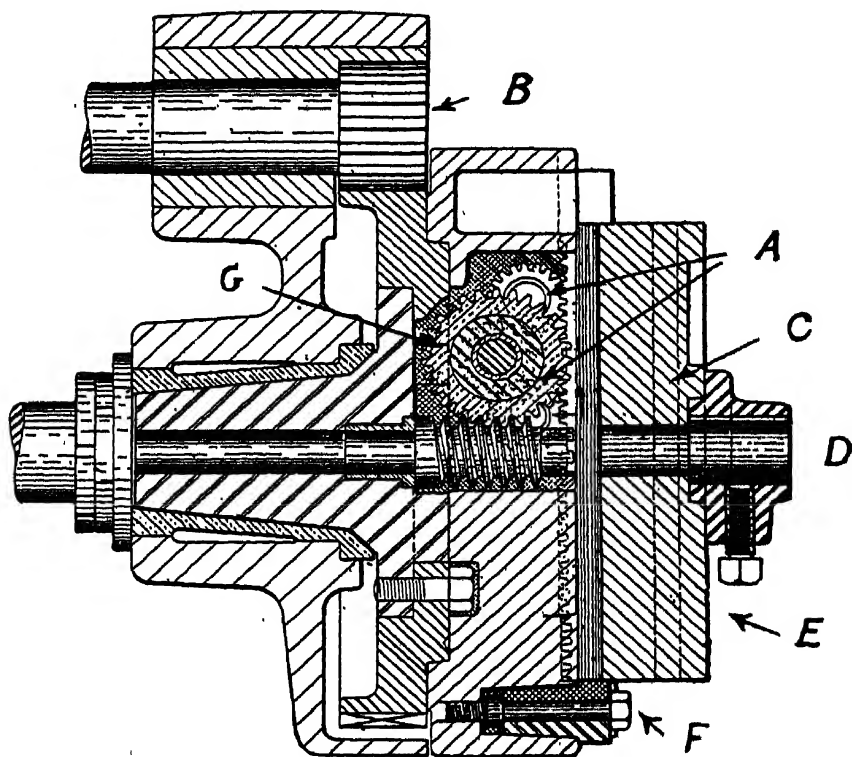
SPINDLE END WITH FACING HEAD OF PEARN-RICHARDS MACHINE
